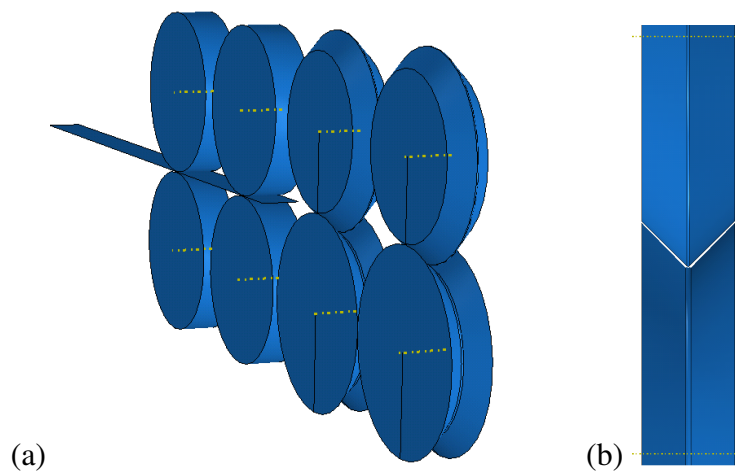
(a) 3D Geometry of a roll forming simulation (b) end view of 90° forming rollers
